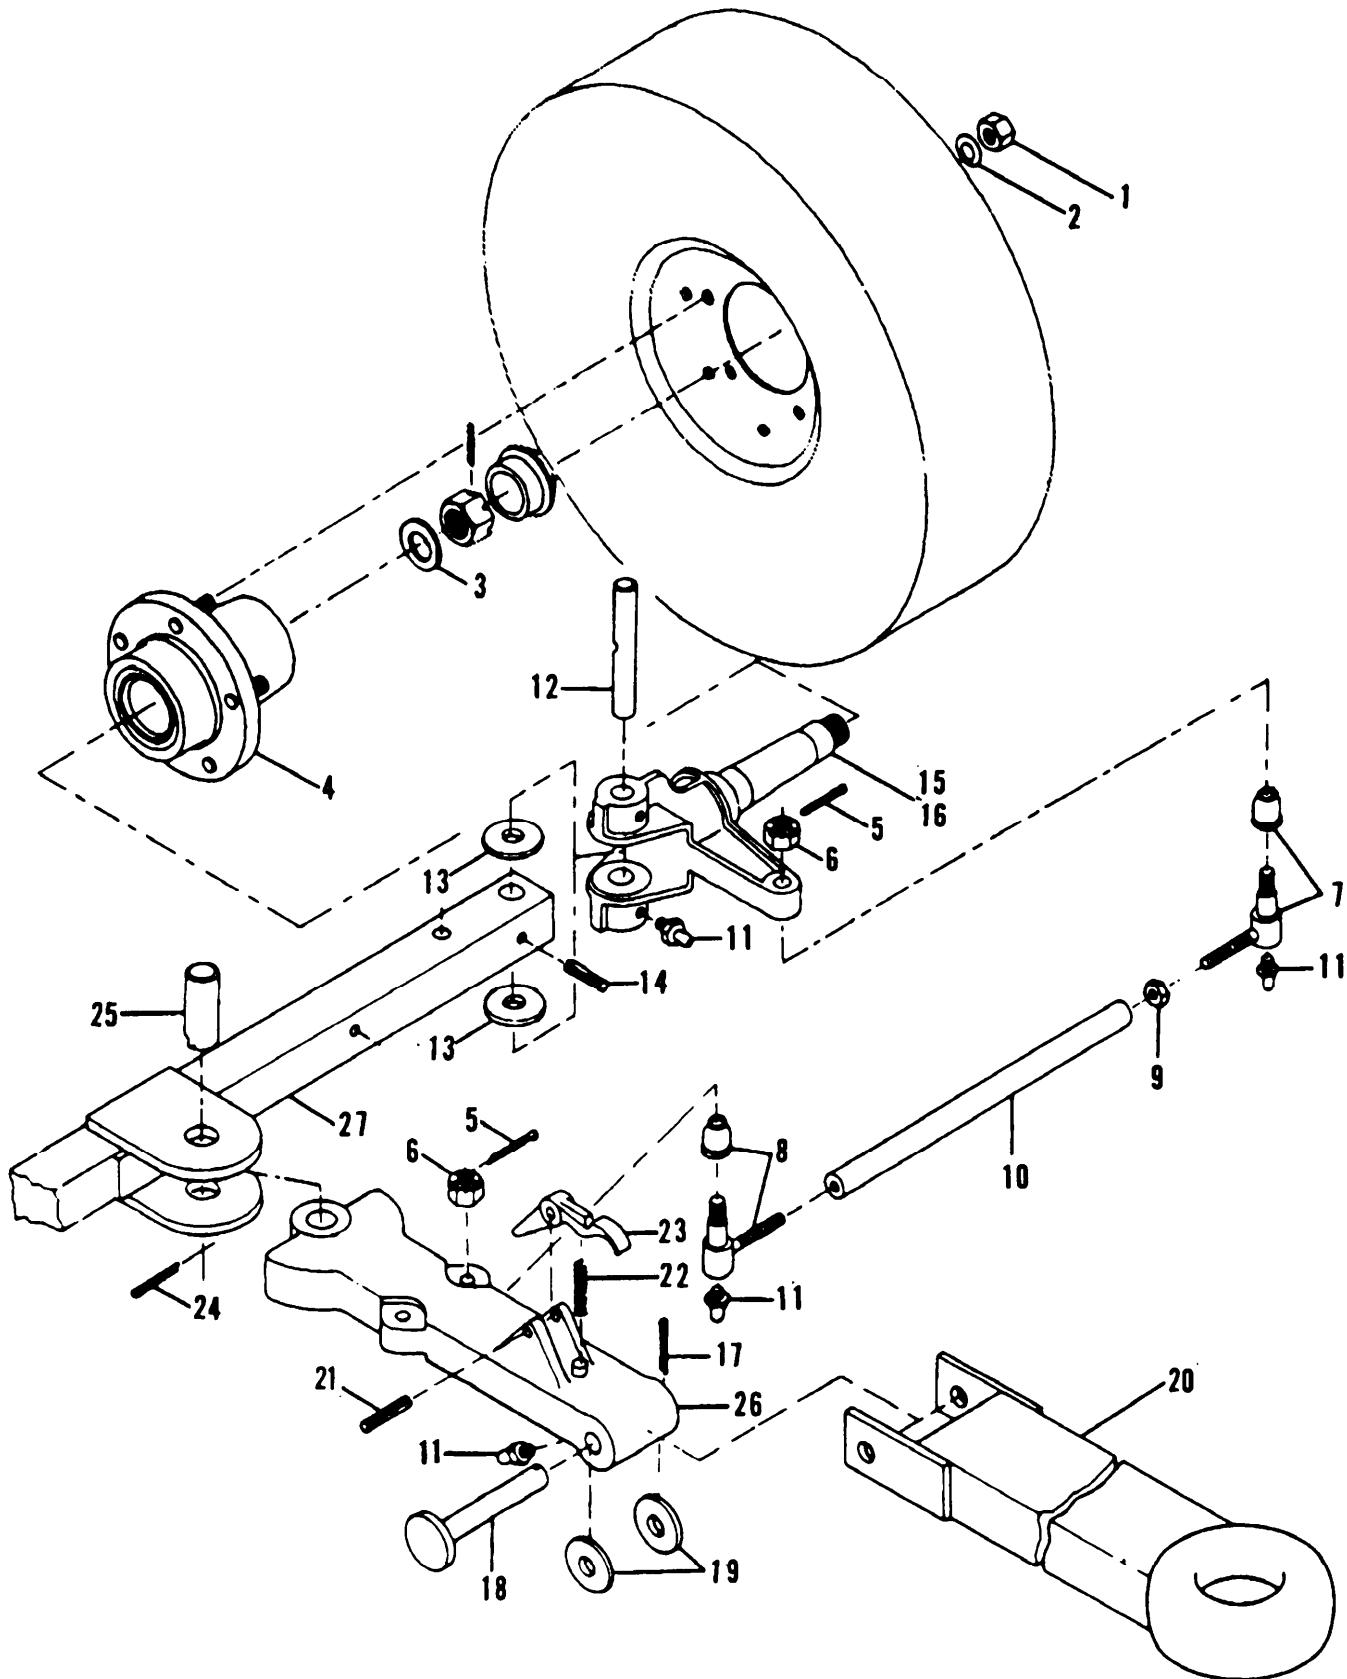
Front Axle Assembly (Sheet 1 of 2)
